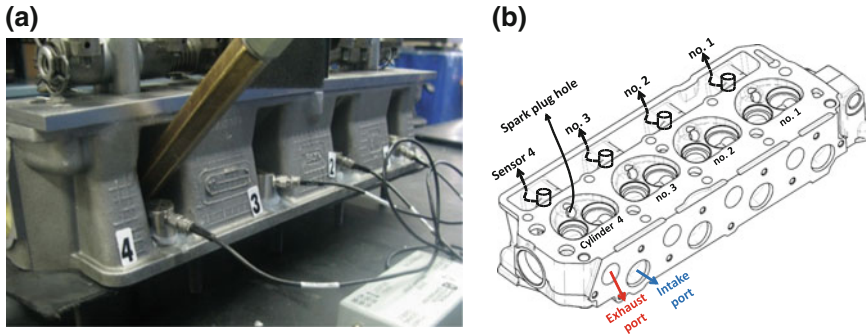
AE sensor positions on cylinder head, a overall view of experimental AE sensor positions, b schematic of cylinder head including intake/exhaust ports, cylinder arrangement, spark plug hole, and AE sensor position
